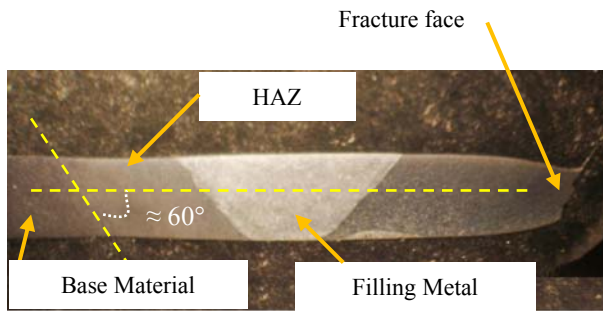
Photograph of a tested specimen showing the welded joint and the fracture surface.
